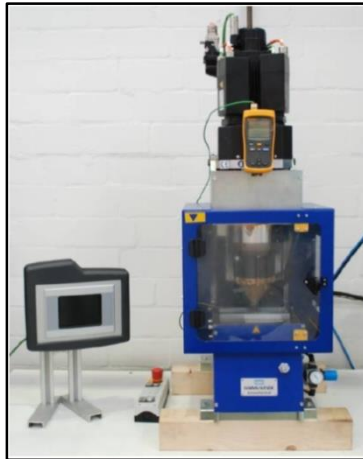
RPS 100 FSpW machine used to produce Al/Cu welds [46].
